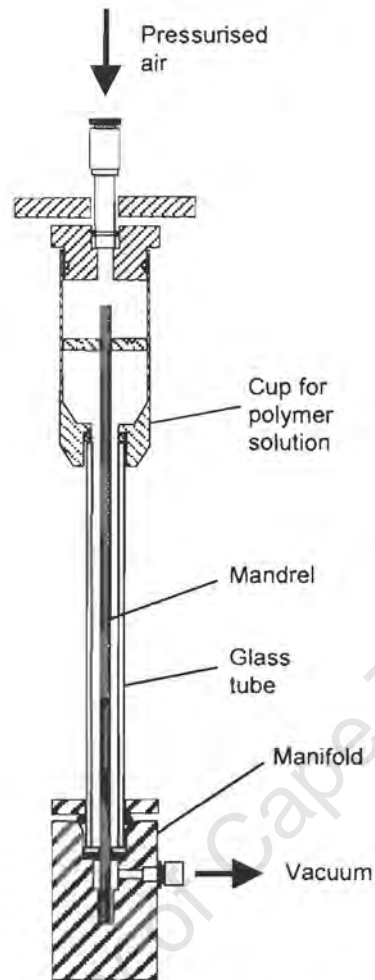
Schematic drawing of a cross-section through the vacuum-pressure casting device.
